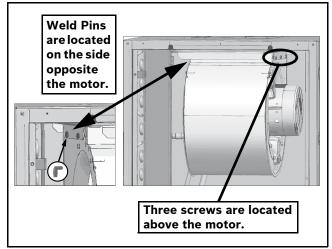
Screws and Welded Pins Locations for Vertical Units
